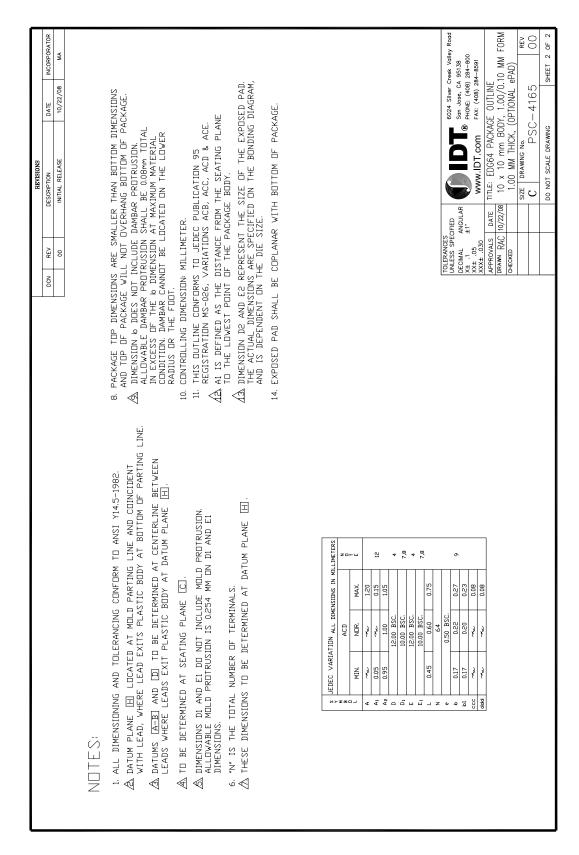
64-Pin EDG Package Dimensions (b) (in Millimeters)
